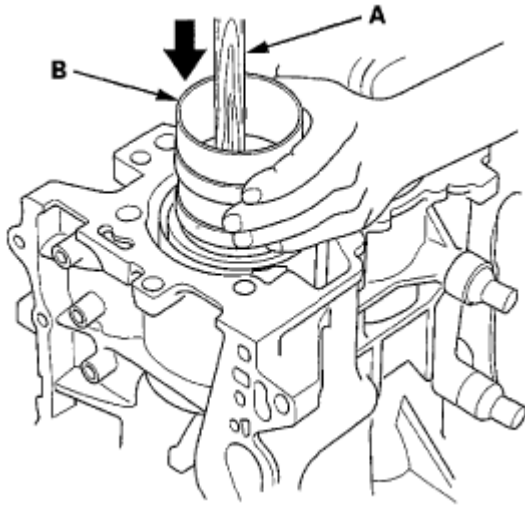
Positioning Piston/Connecting Rod Assembly Cylinder Using Hammer
